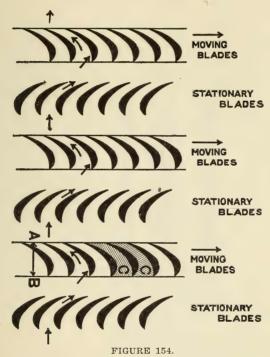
showing arrangement of blading and course of the steam in Parsons steam turbine.
